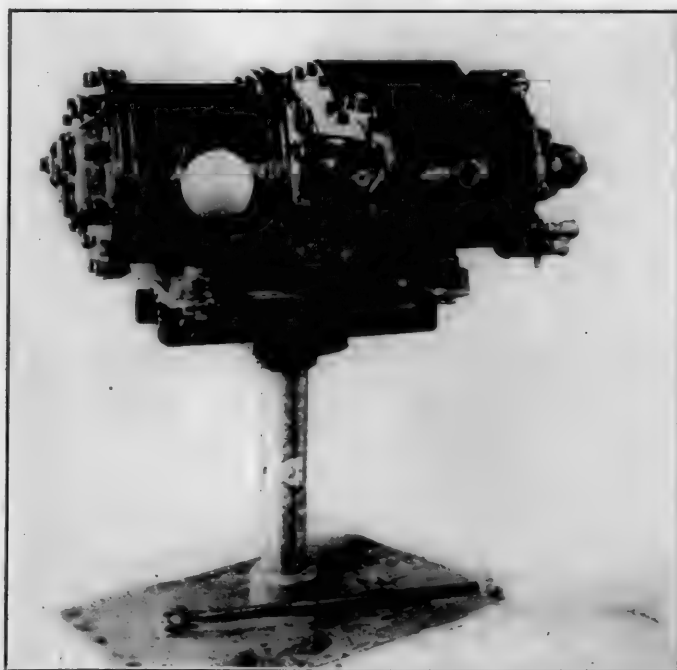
Air Compressor Lifted and Ready to be Overhauled
